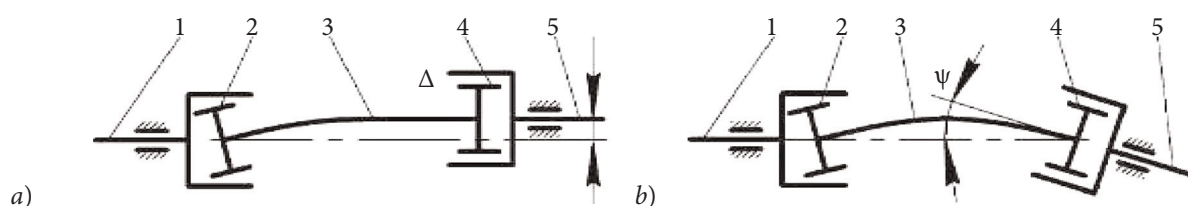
Displacement (a) and misalignment (b) of the axis of the gear mechanism: 1 – motor shaft; 2, 4 – toothed bushings; 3 – spring; 5 – drive mechanism shaft
